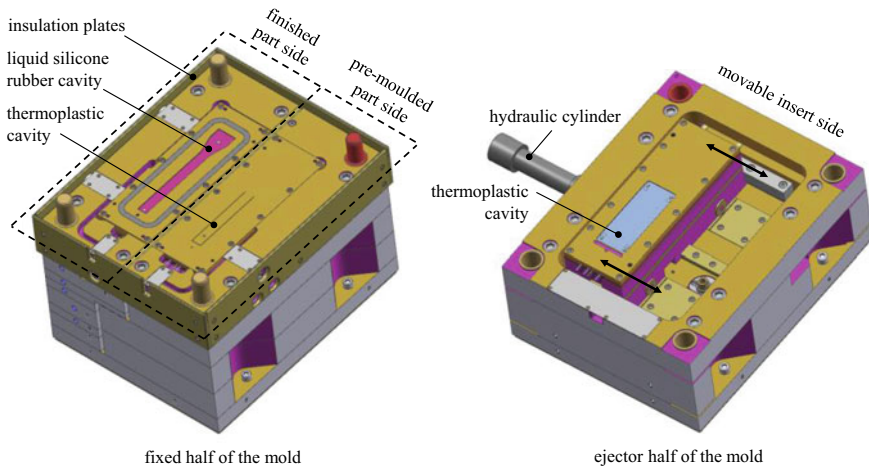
Layout of the two-component injection mold for the production of peel test specimens
